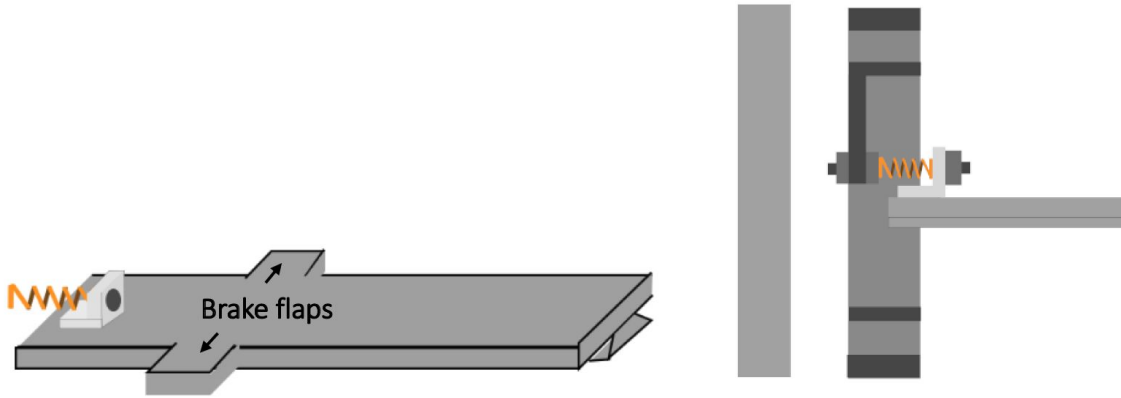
Perspective view of spring-propelled cart (left) and cross section view showing full spring attachment setup (right)
